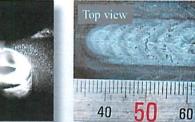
Arc Weld pool visualization during gas tungsten arc welding by a special illumination and optical filtering system
